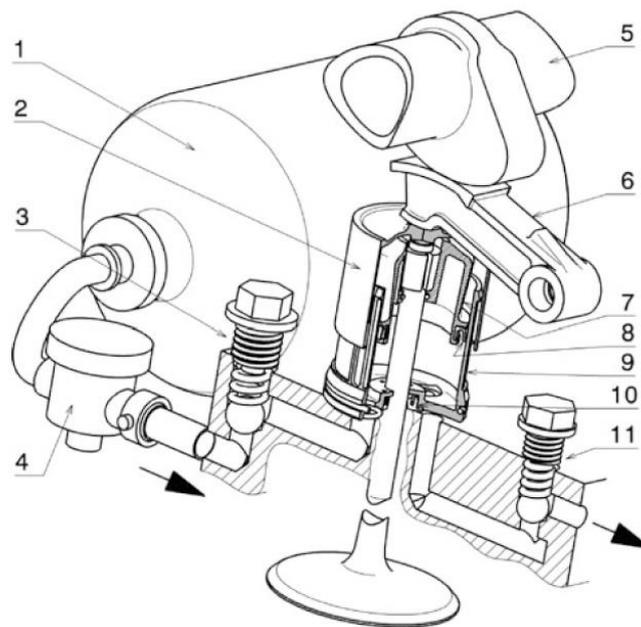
Pneumatic valve return system (Trzesniowski, 2014)
